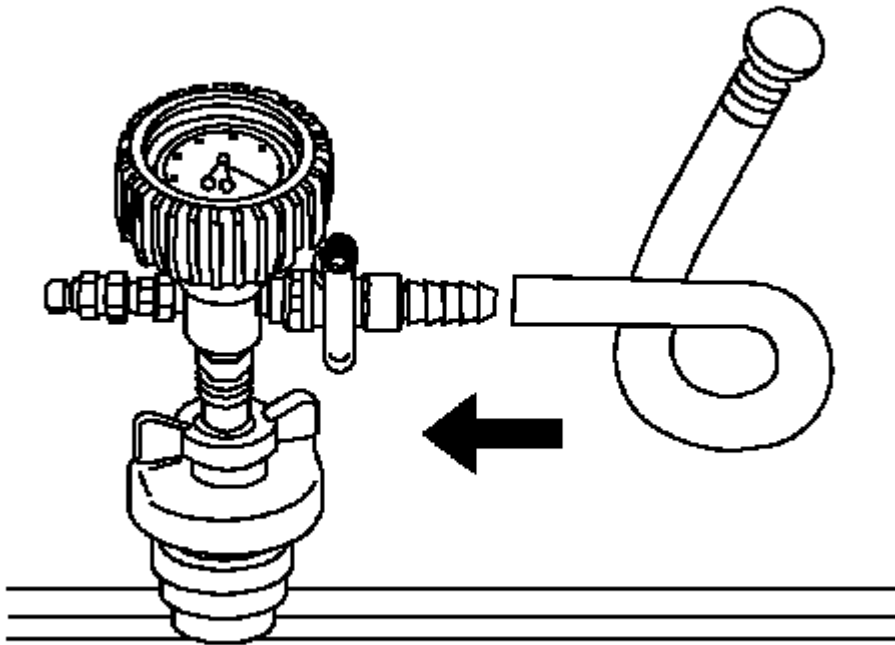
Attaching Fill Hose To Barb Fitting On Vacuum Gage Assembly
